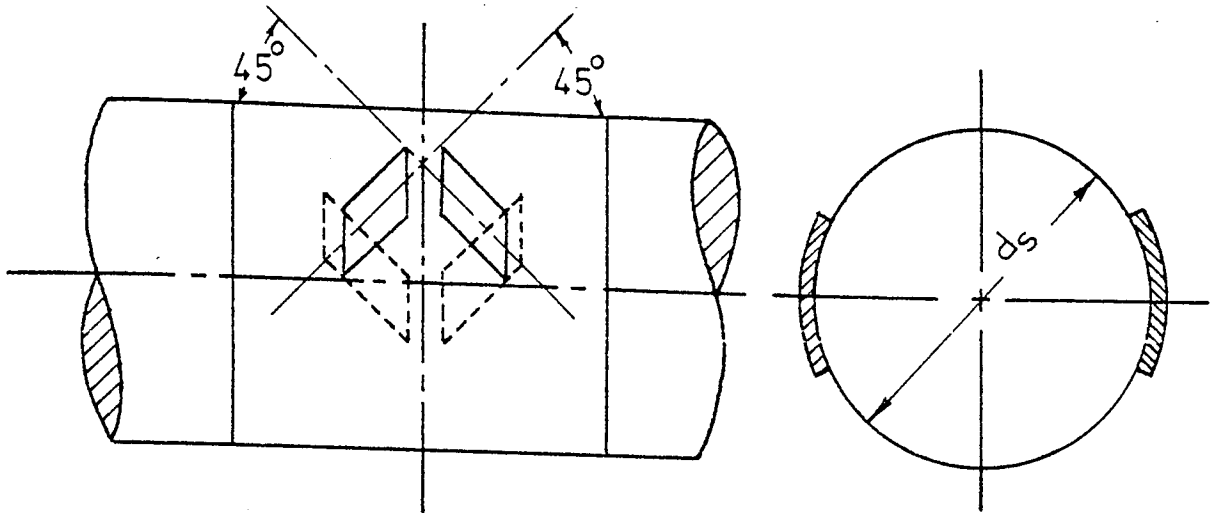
LOCATION OF TORQUE GAUGES ON THE HOB SHAFT
